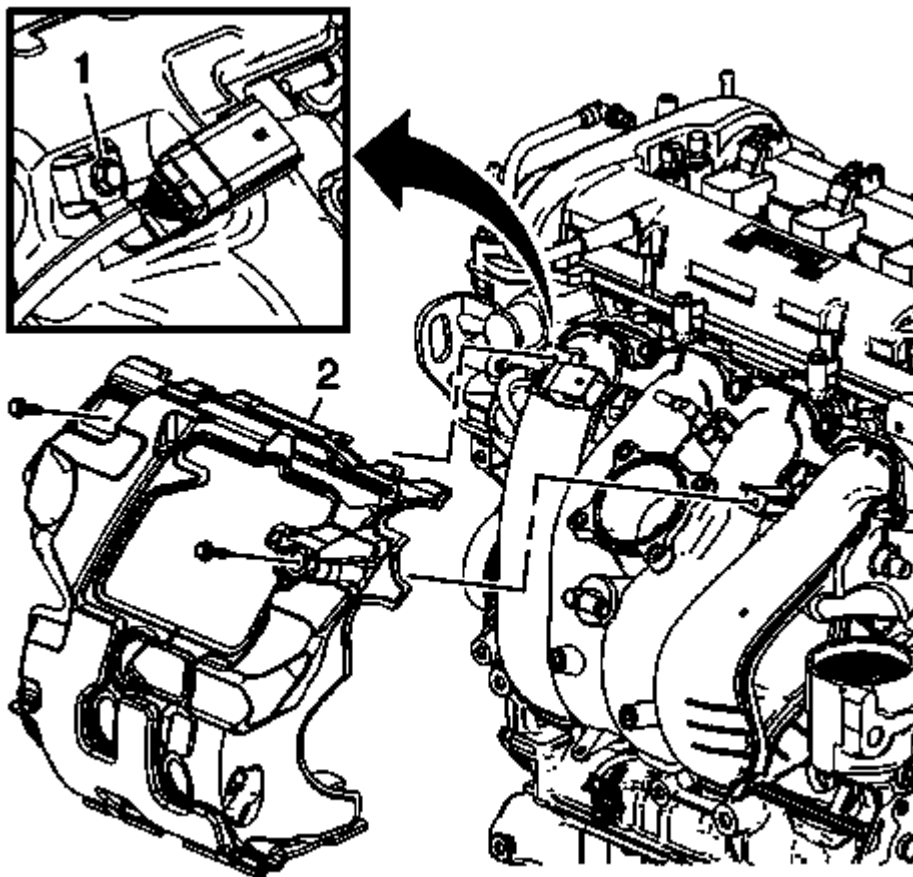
Intake Manifold Retaining Nuts And Bolts
